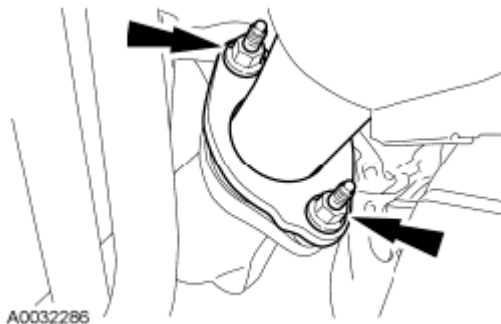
Locating Exhaust Manifold-To-Front Pipe Nuts
